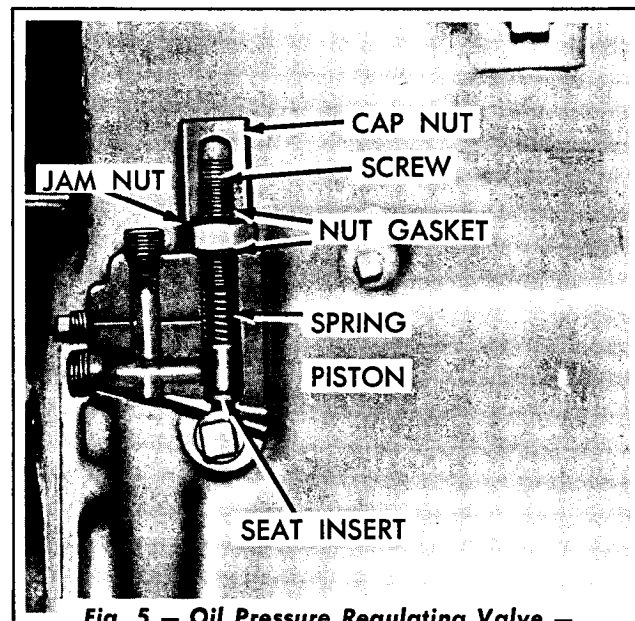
Oil Pressure Regulating Valve — Cutaway View
